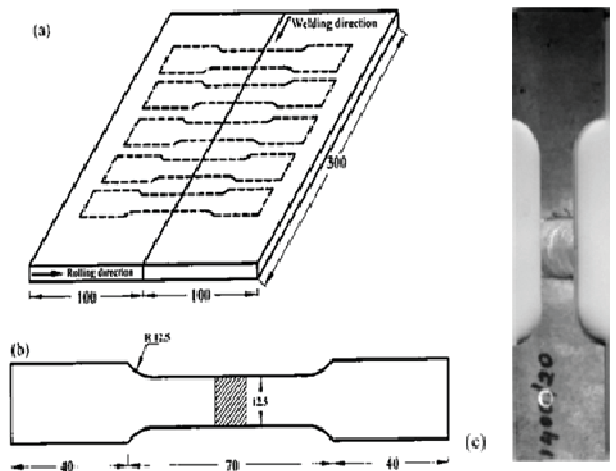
(a) Scheme of extraction [1] and (b) dimensions of tensile specimen (c) sample specimen
